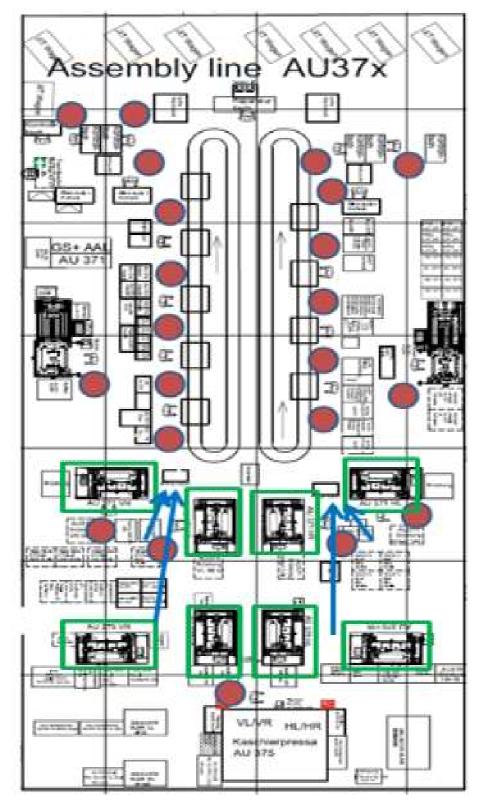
Welding - models 371 and 375 - second step on assembly line: (Internal documentation of SMP Slovakia)
